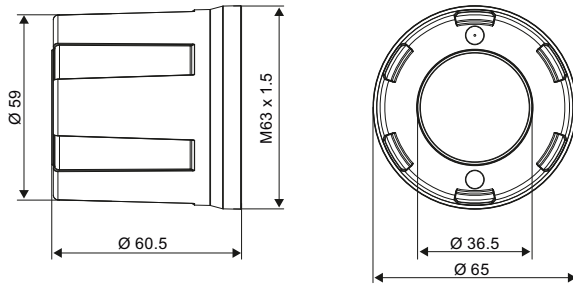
Dimension drawing: Protective lens cover \varnothing 65 mm; plexiglass
